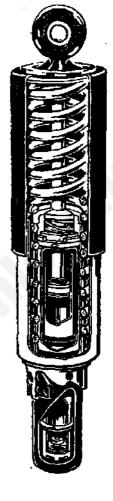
INTERNAL VIEW AND ARRANGEMENT OF SUSPENSION UNIT.
